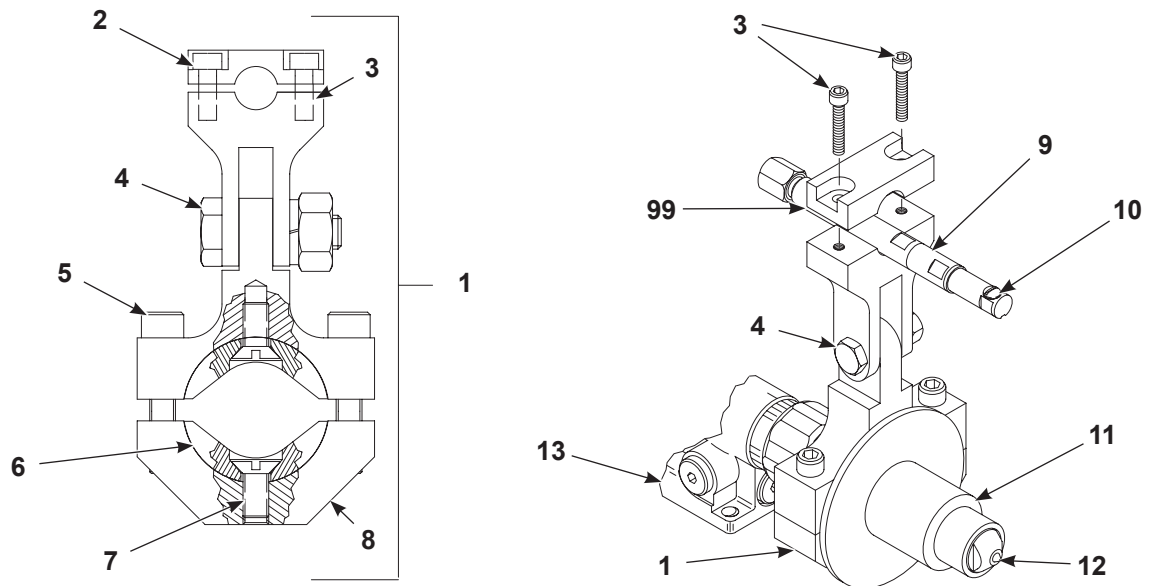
Adjustable Bracket, Check Valve, and Nozzle Installation (MEG Gun Installation Shown)
